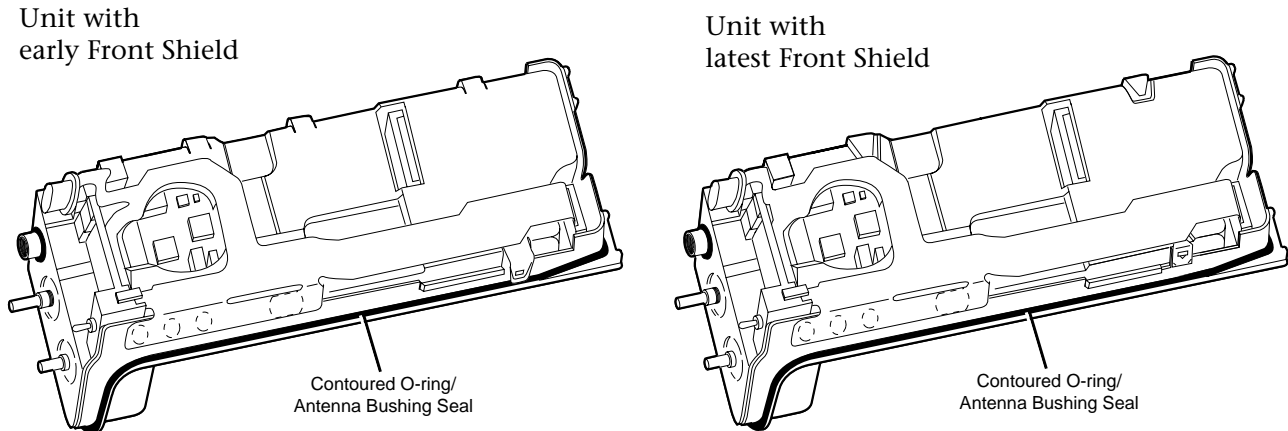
Installing the O-Ring/Antenna Bushing Seal
